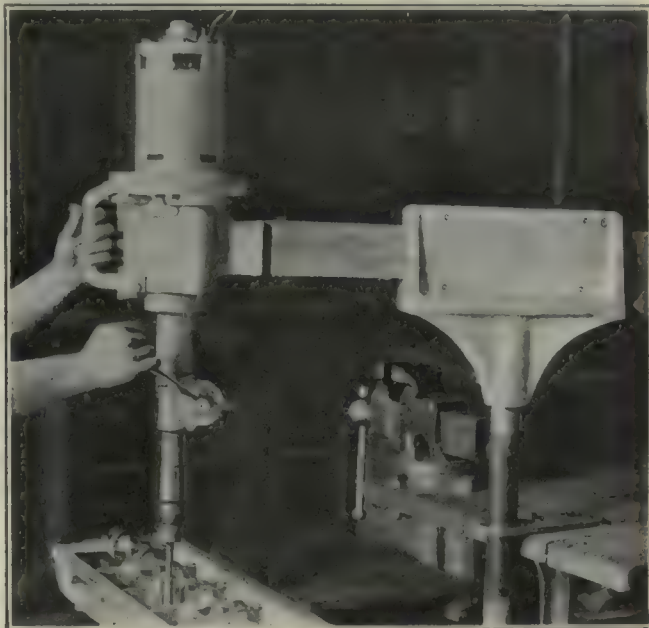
"ELEC DRIVE" STATIONARY SCREW AND NUT SETTING TOOL
